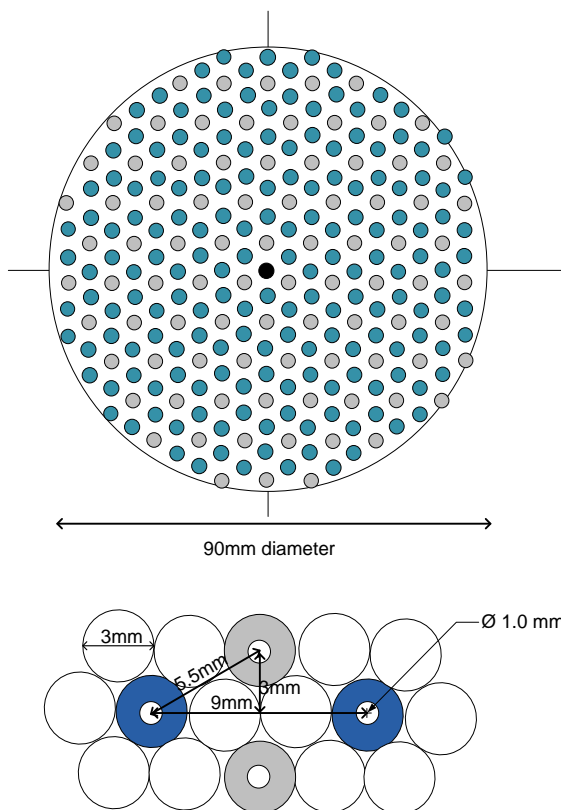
Hexagonally arranged hole (1mm diameter) drilling pattern:
